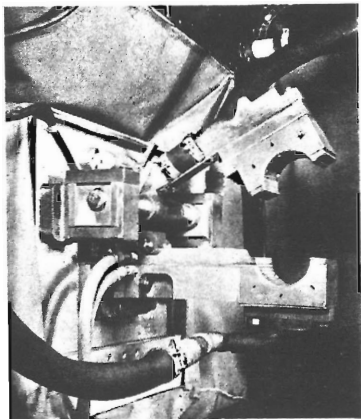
An integral coil-quench block of the split type, which clamps together during heating. (*The Ohio Crankshaft Corp.*)
